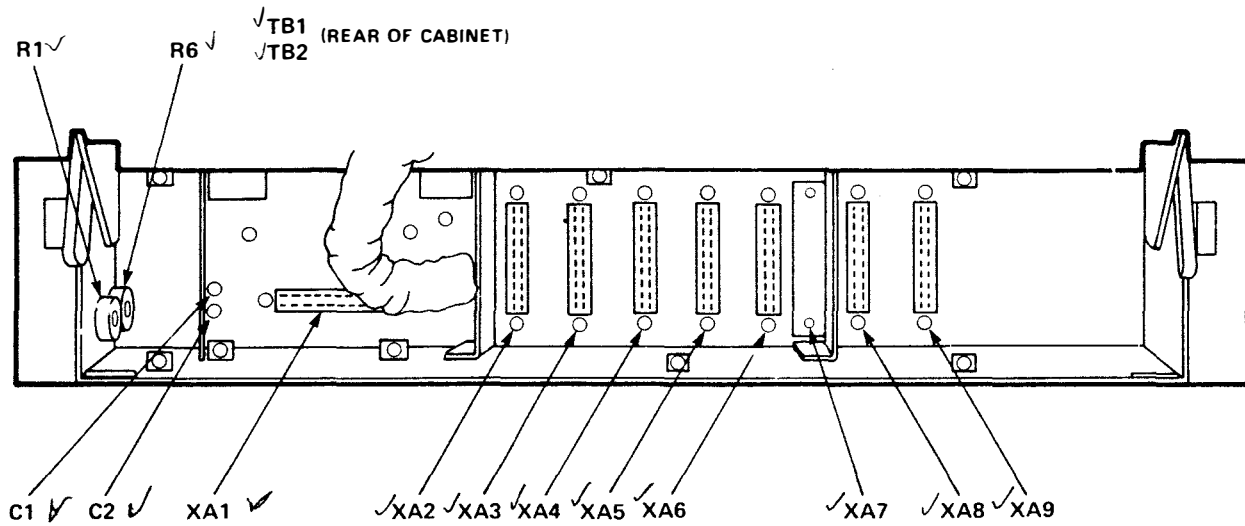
Chassis Parts Location, Interior (Sheet 1 of 2)
